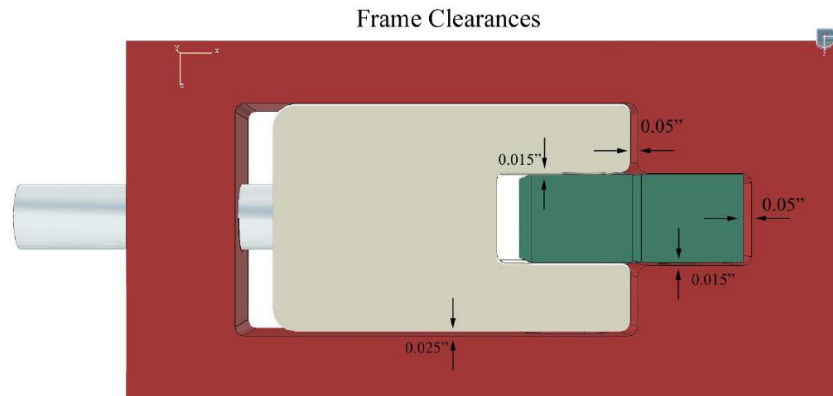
Clearances Between the Load Frame, Clevis, and CT Specimen.
